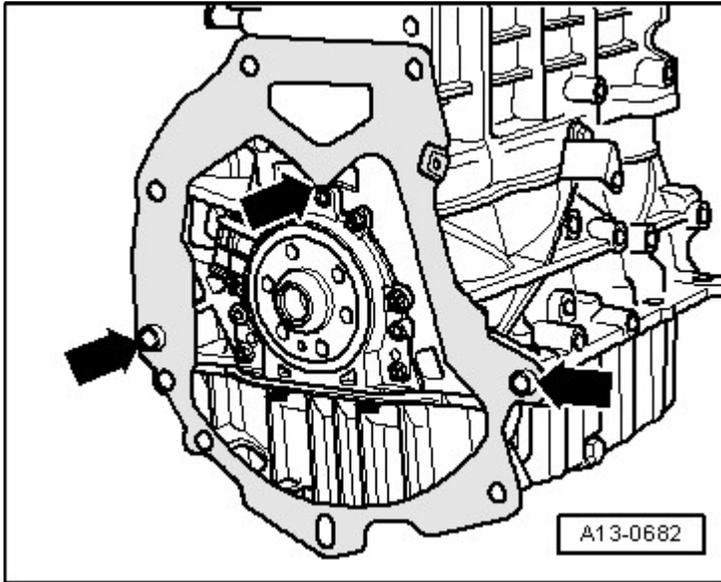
Identifying Intermediate Plate Is Hooked In At Sealing Flange And Is Pushed Onto Alignment Sleeves
